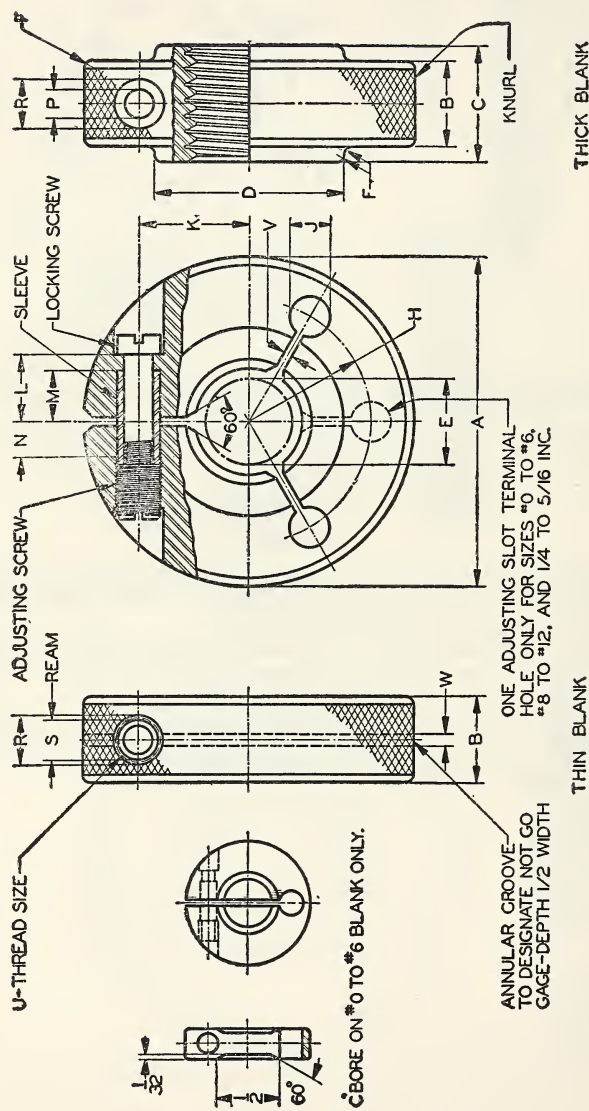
American Gage Design Standard thread ring gages, details of construction—Concluded.
